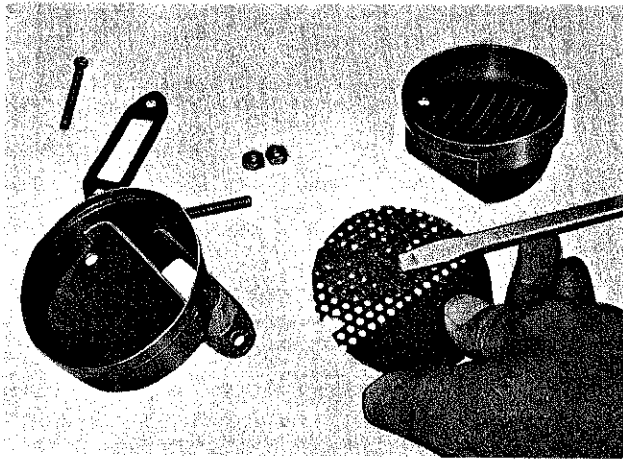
Scraping the muffler baffle to clean and open all holes.
